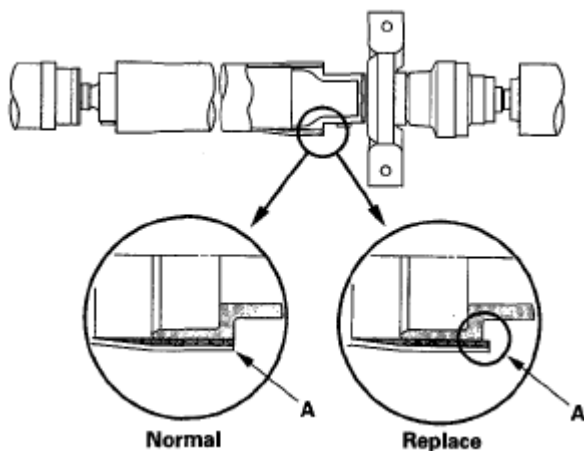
Inspecting Difference Of No. 1 Propeller Shaft
